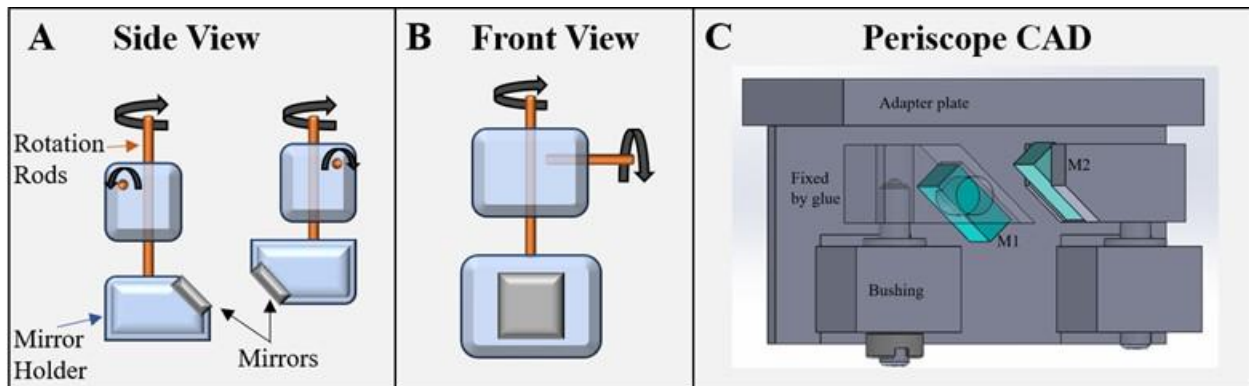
Compact periscope design. Panels A and B illustrate a side and front view schematic of the periscope design, showcasing the aluminum mirror holder with a padded screw securing the mirror at approximately a 45° angle. A rod is attached to the mirror holder, extending vertically and connected to another aluminum block. The aluminum block features a horizontally protruding rod. Both rods are mounted in bushings, allowing for rotational freedom of the mirror holder. Panel C displays a SolidWorks computer-aided design (CAD) image, featuring the labeled adapter plate for attachment to the rotational stage.
